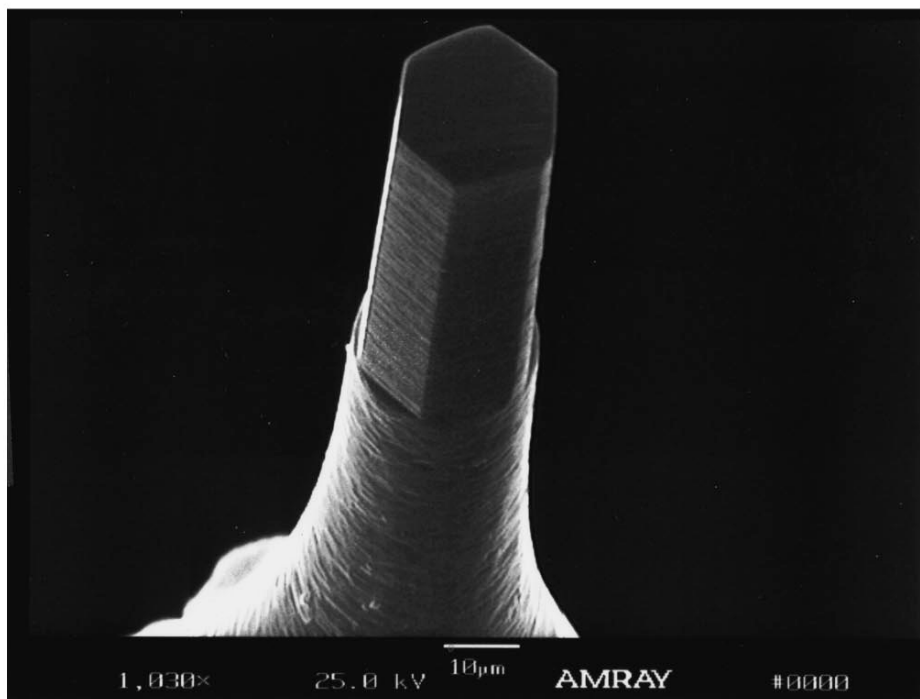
SEM of a six facet cutting tool for ultraprecision machining [14].
